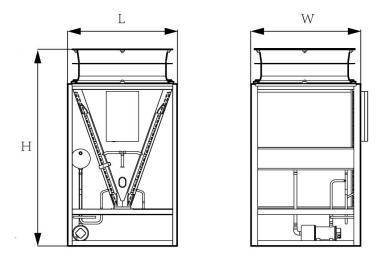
Dimensional drawing of V-type condenser with pump cabinet
